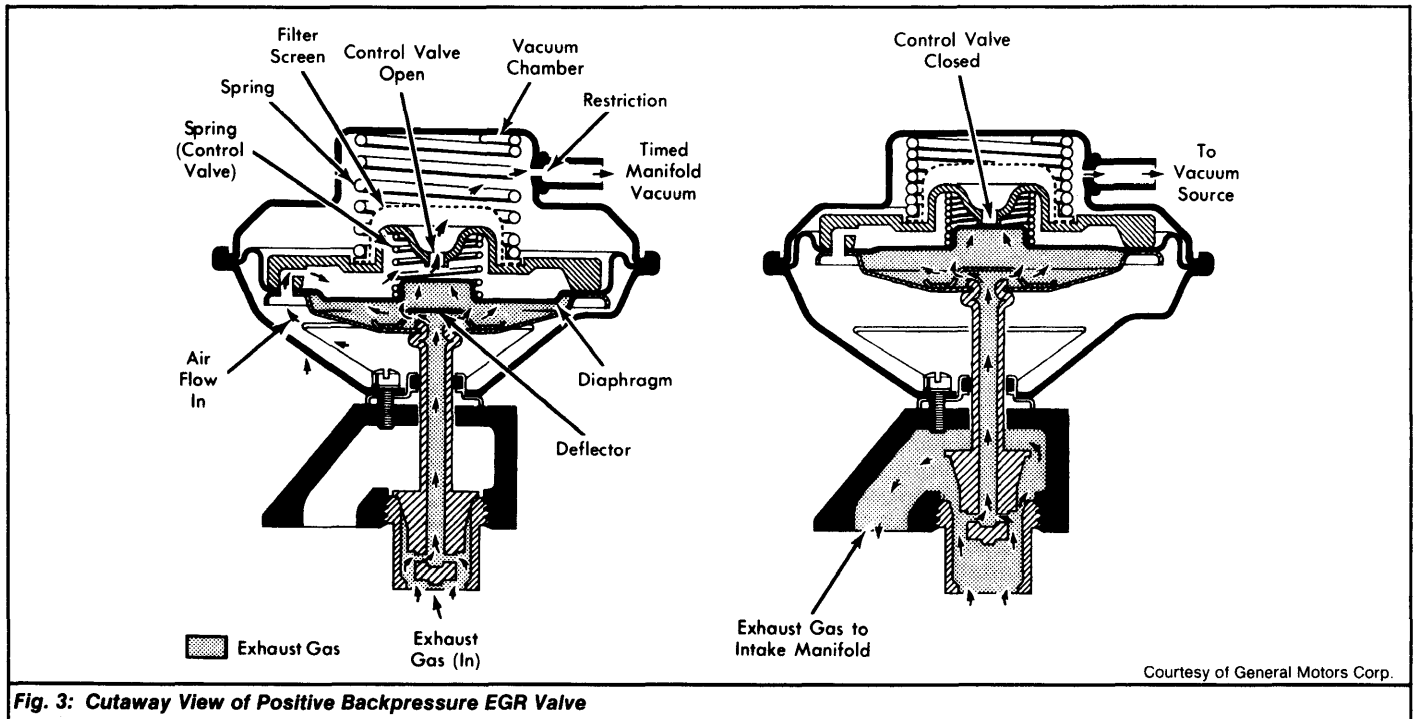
Cutaway View of Positive Backpressure EGR Valve
